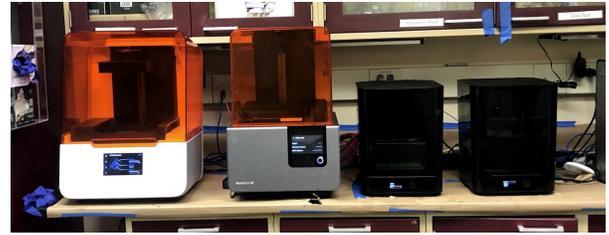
FORM 3B PRINTER AND ITS COMPONENTS.
